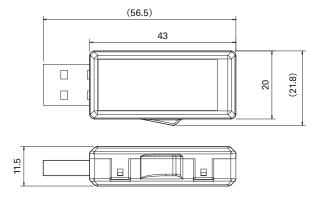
Dimensional drawing of Wireless Adapter 3A (Unit: mm)
